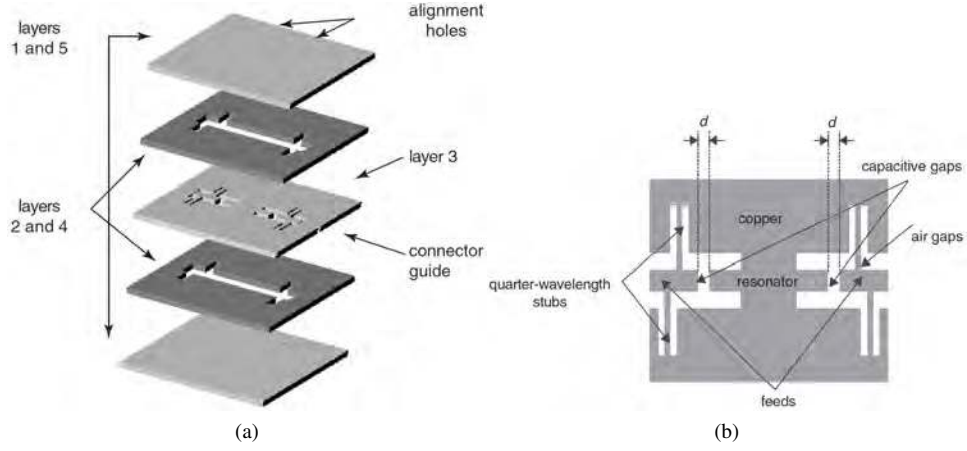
3D suspended air-filled coaxial line. a) five-layer coaxial assembly b) top view of layer 3, showing the centre conductor of the coaxial cable filter (source [83]).
